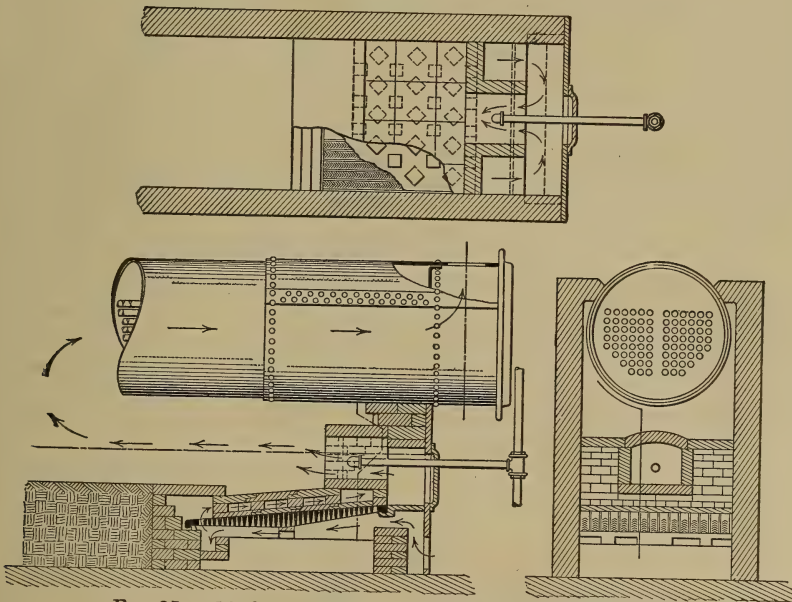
Modern Furnace for Burning Fuel Oil, Front Feed.
